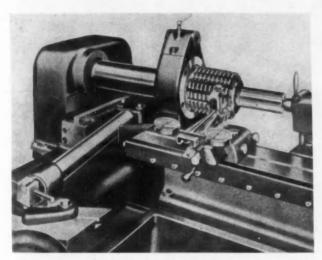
Hob on lead-testing machine which employs the sine-bar method of checking
